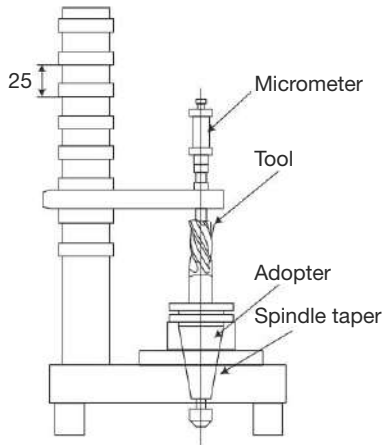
Typical tool-setting system useful for machining centre tooling
